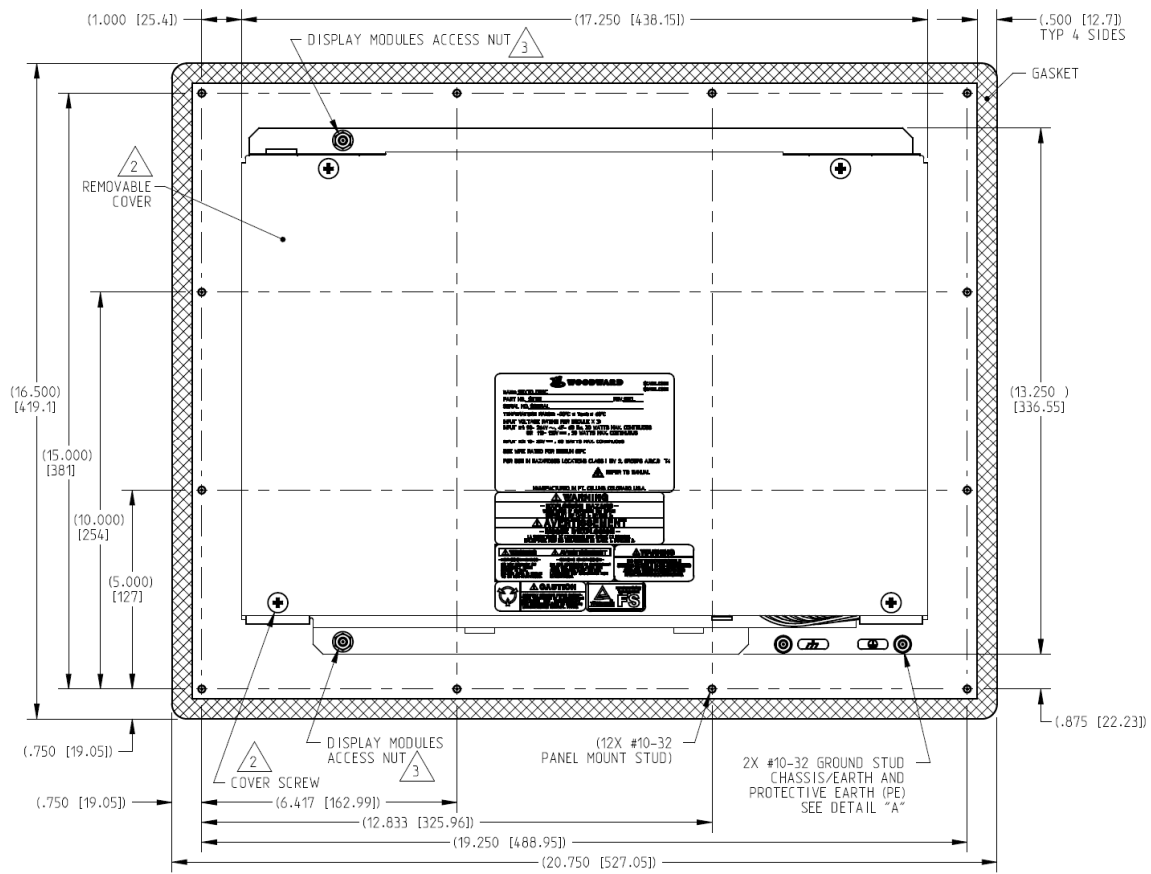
Mounting Outline Diagram for Panel-Mount Models
